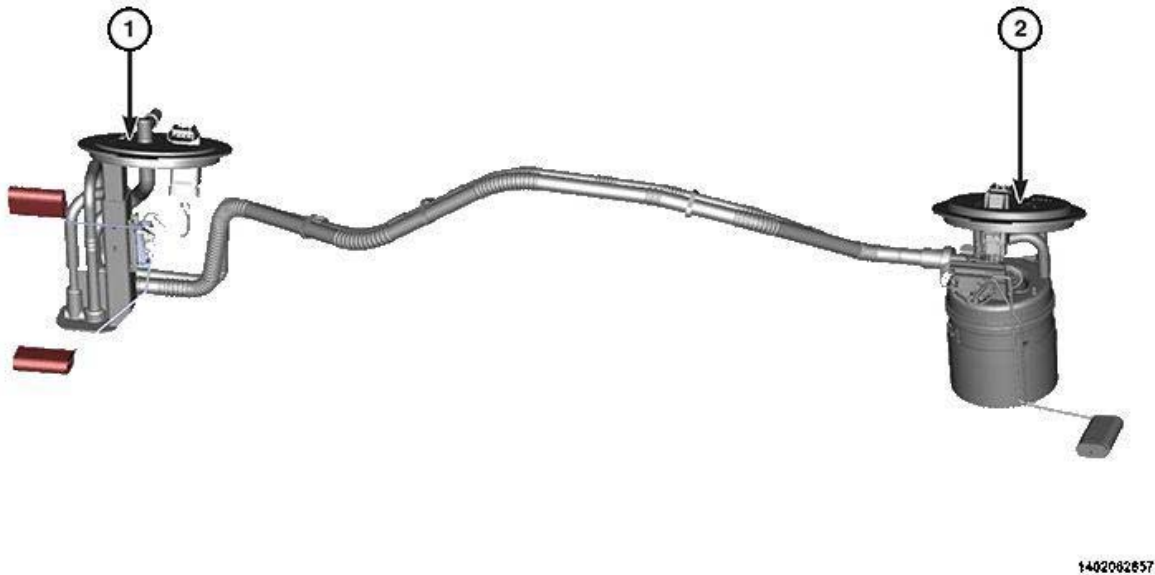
Auxiliary Fuel Pump Module & Main Fuel Pump Module
